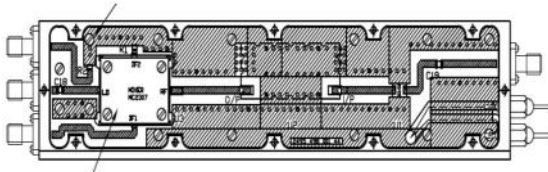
Assembled PCB Layout of RF side mounting details is shown in Fig 6.
